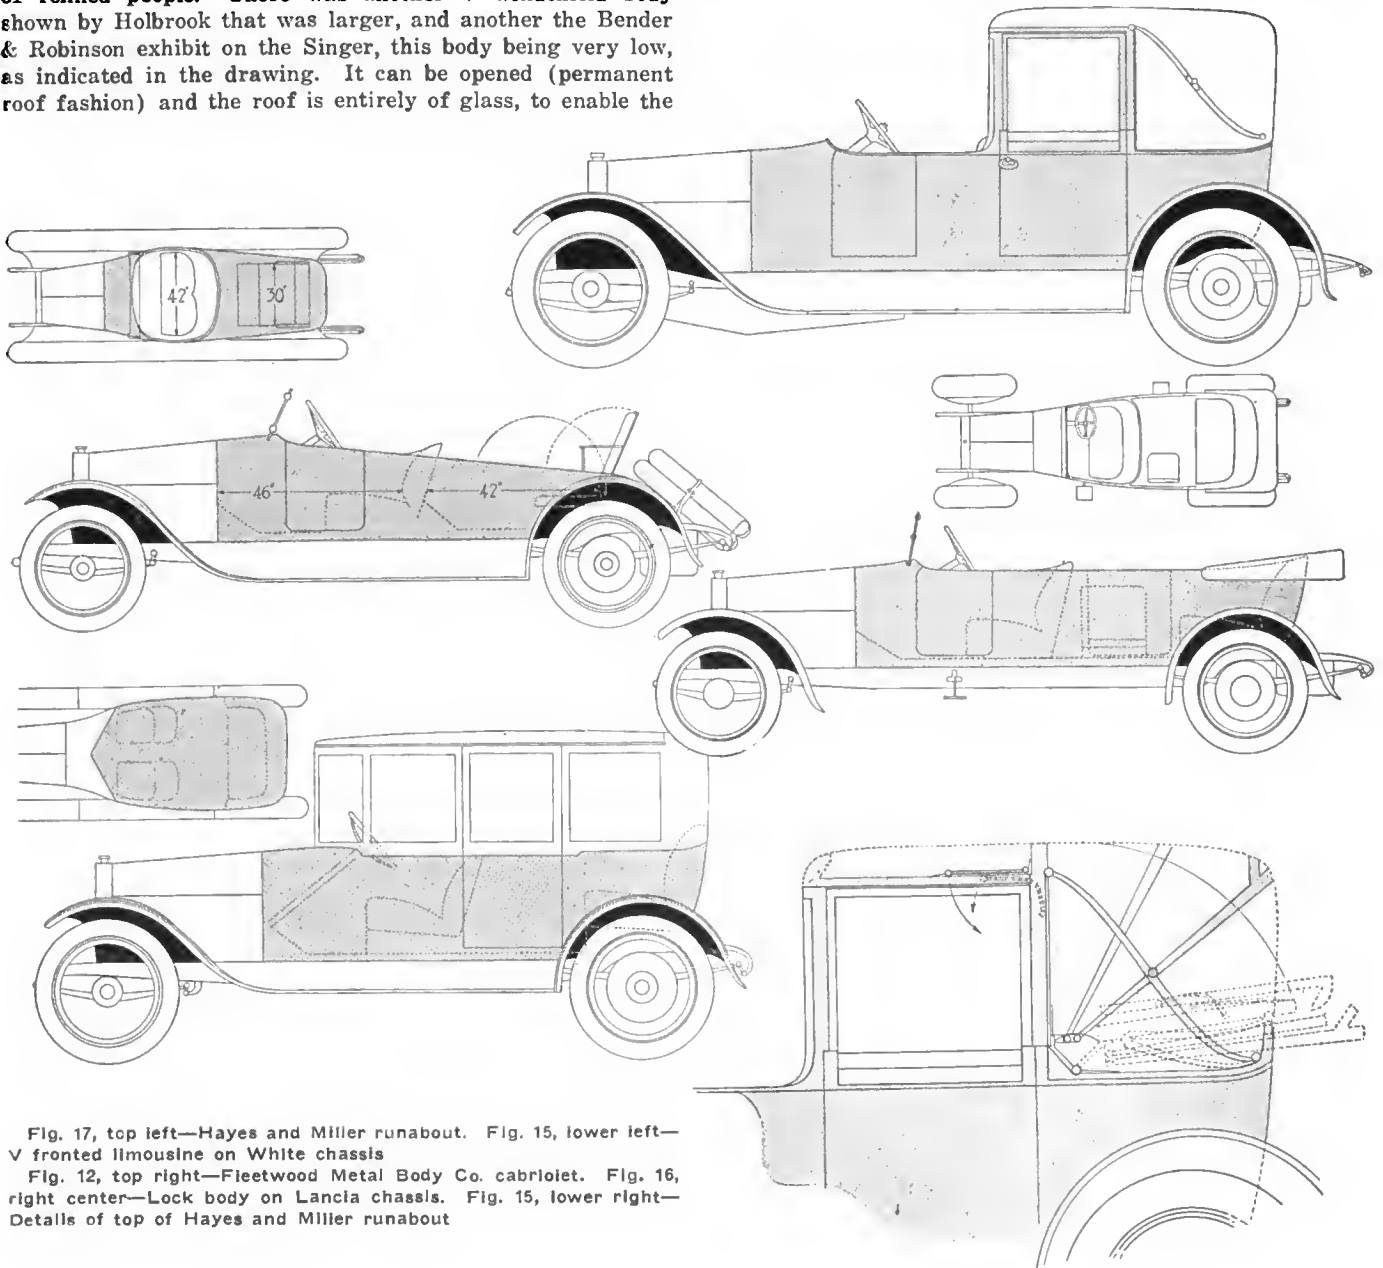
, top left—Hayes and Miller runabout. Fig. 15, lower left—V fronted limousine on White chassis
